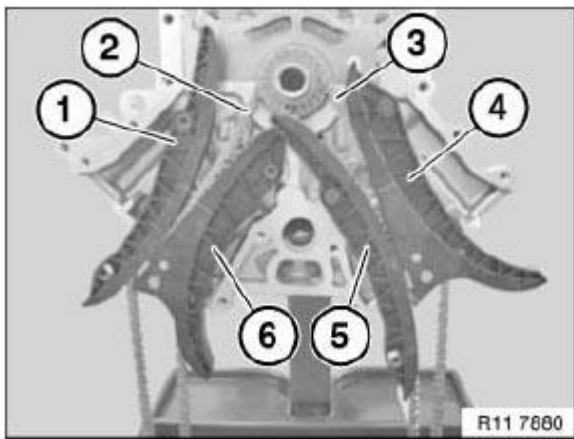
Identifying Guide Rail, Timing Chain And Tensioning Rail
